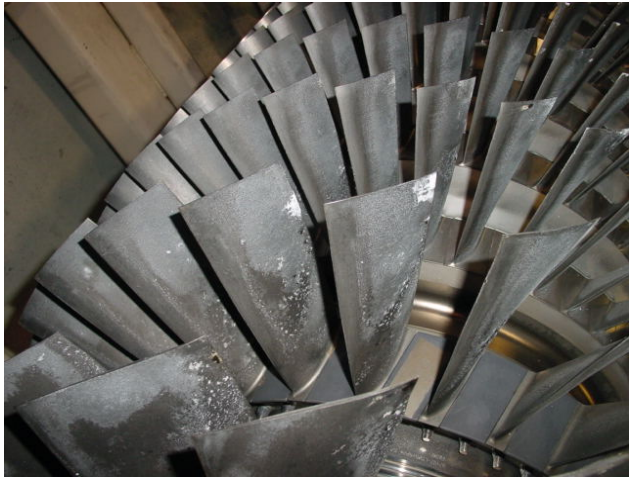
Salt Deposits on Compressor Blades (Courtesy, Turbotect Ltd.)
